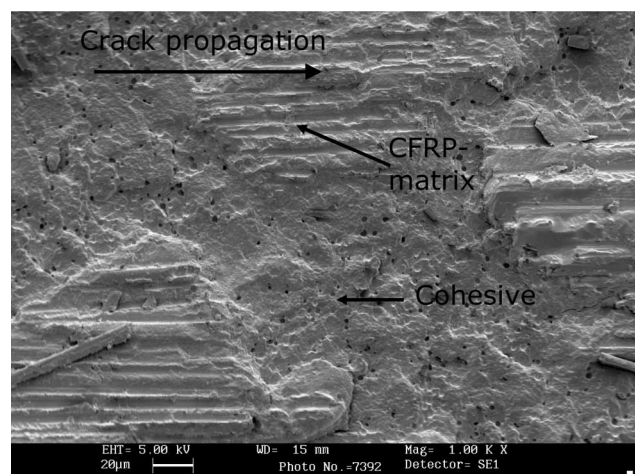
Fracture surface of a specimen tested in IF
